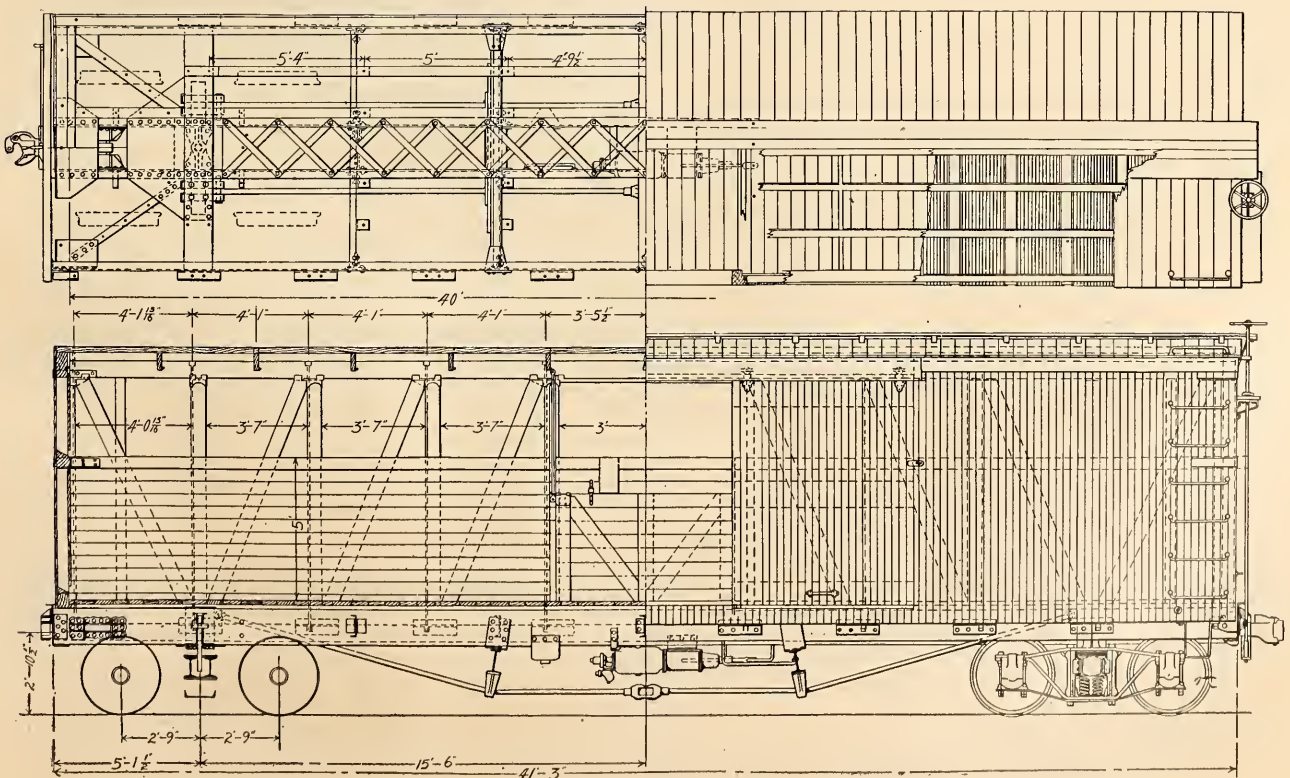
PLAN AND ELEVATION OF 100,000-LBS. CAPACITY BOX CAR WITH STEEL UNDERFRAMING.
